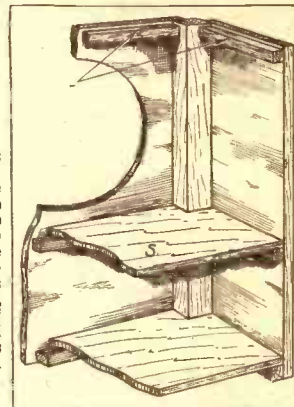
This is the method of arranging the inside of the cabinet. Note the fillets (F) at the top. The upper compartment contains the loudspeaker, and the shelf (S) is screwed to fillets, as clearly shown in this drawing.
